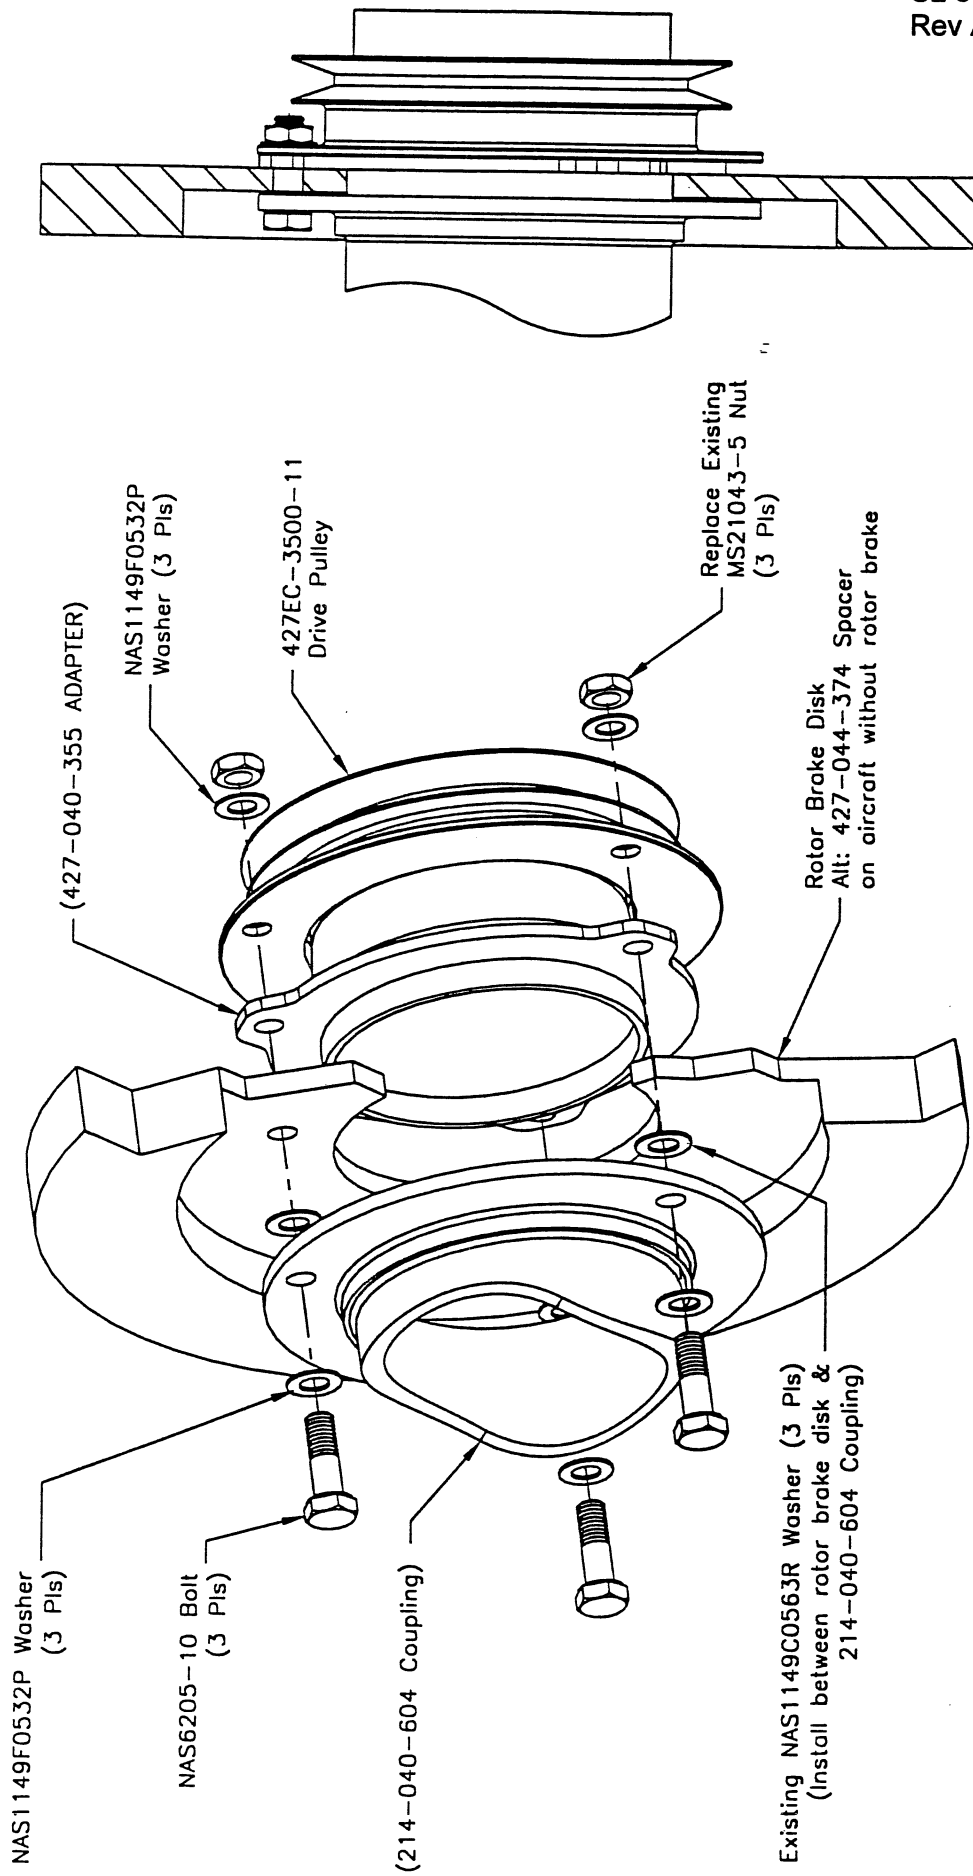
Driveshaft Installation (Exploded / Side View)
